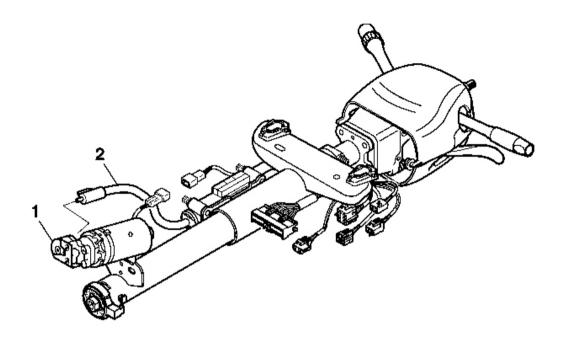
Cable Assembly & Telescope Drive Motor Assembly Courtesy of GENERAL MOTORS CORP.
